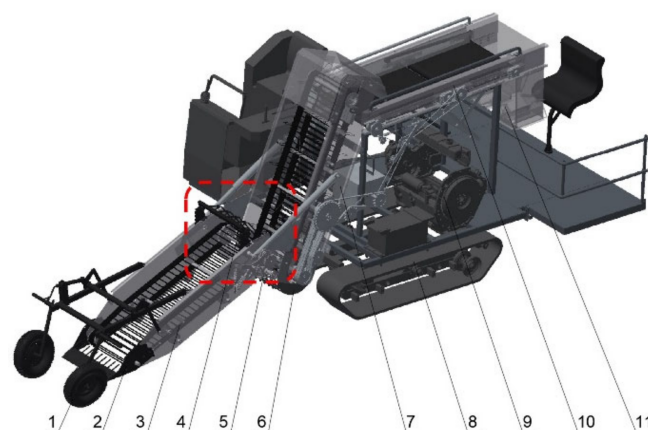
Structure diagram of the small self-propelled potato combine harvester. 1. Depth limiting device; 2. Excavation shovel; 3. Separating rod sieve; 4. Stem guide bar; 5. Grooved stem picking roller; 6. Curved handing part; 7. Lifting and conveying mechanism; 8. Tracked chassis; 9. Engine; 10. Selecting table; 11. Potato collection device.
